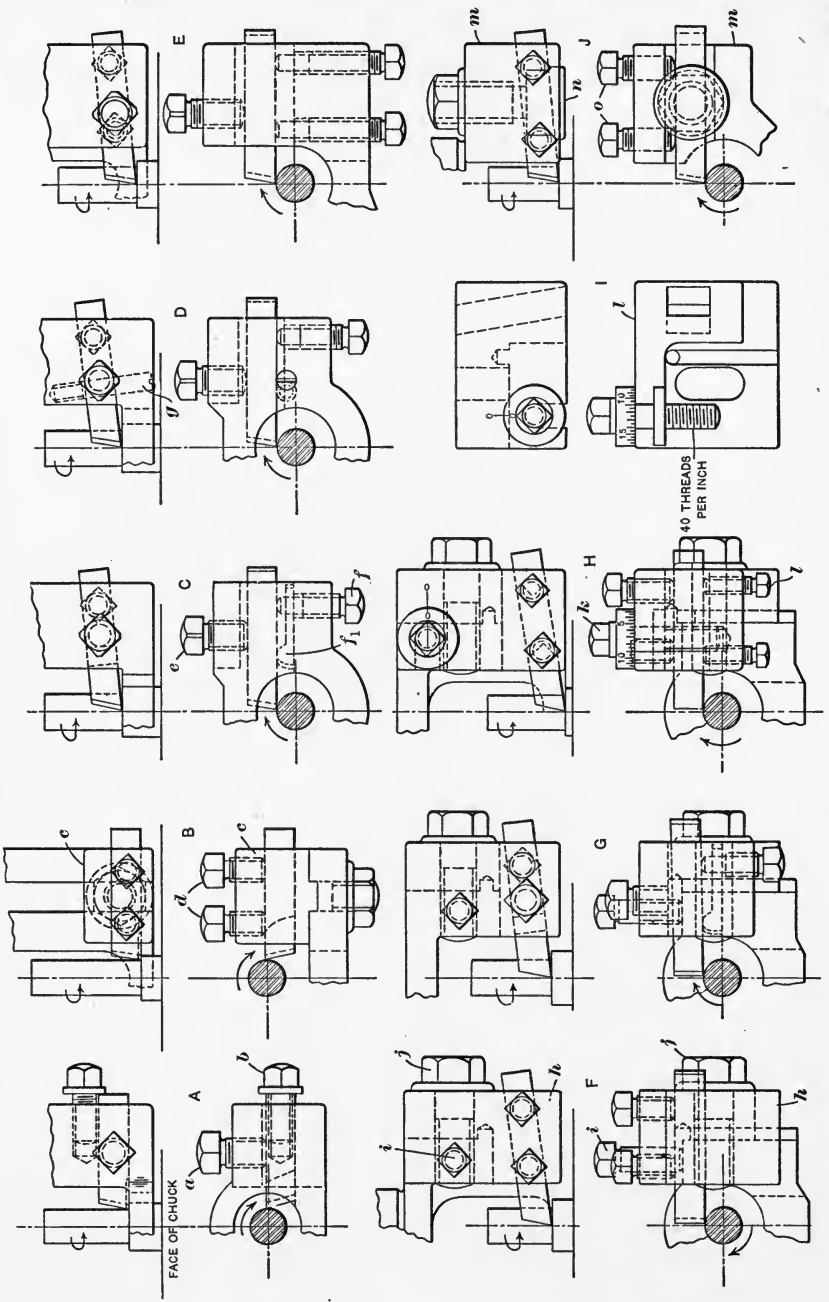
Holding and Adjusting Box-tool Cutters for Various Conditions
